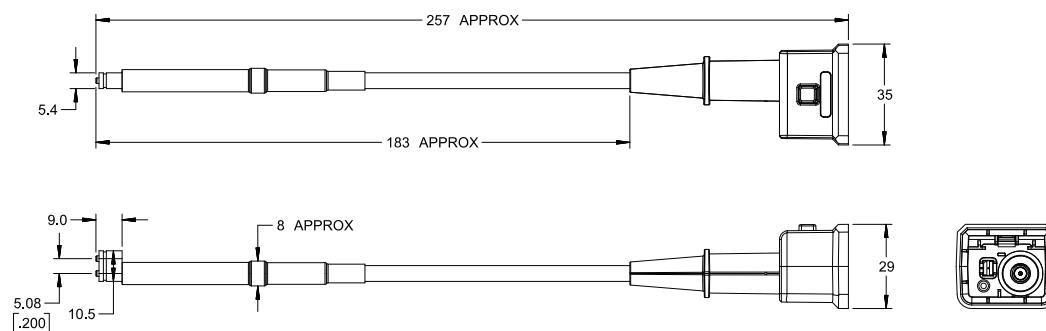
200 Mil Pitch Socket Probe Tip Dimensions
